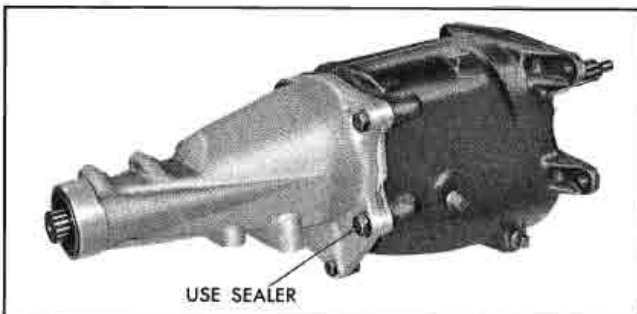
B-33 Sealing Lower Right Attaching Bolt
